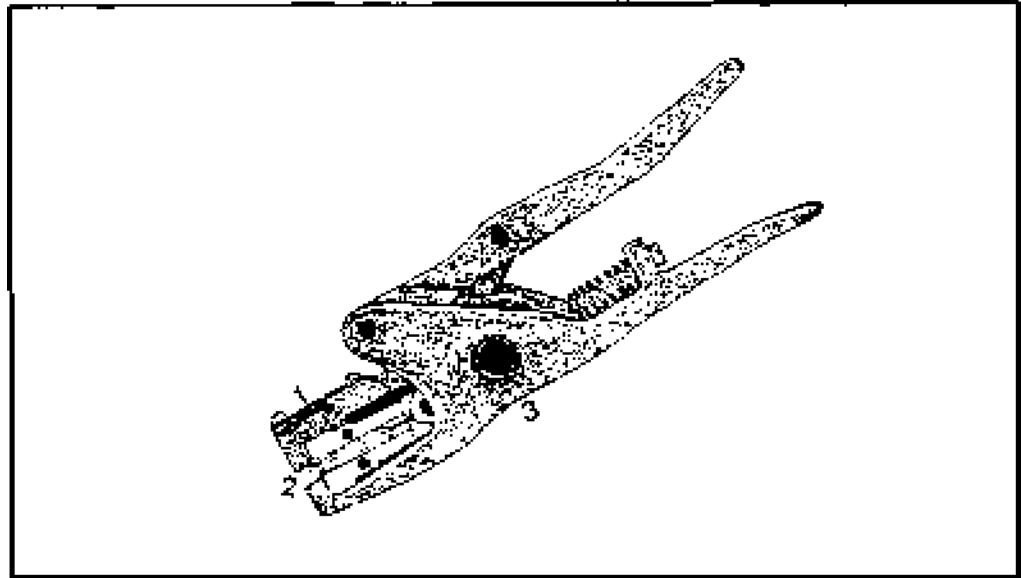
Automatic wire strippers 1) adjustment screw, 2) stripping blade, 3) wire cutter
